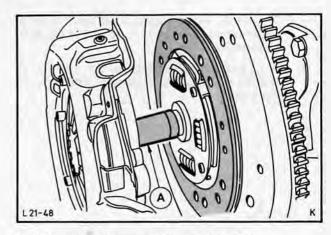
Fit clutch pressure plate and clutch disc A – Special Tool
